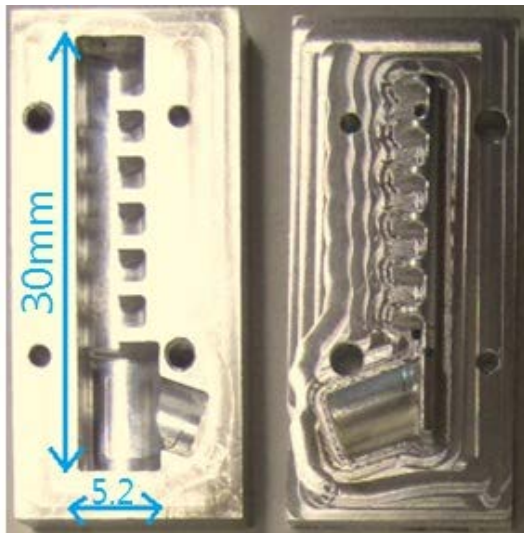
Convex and Concave molds for AFPAs Manufacturing
